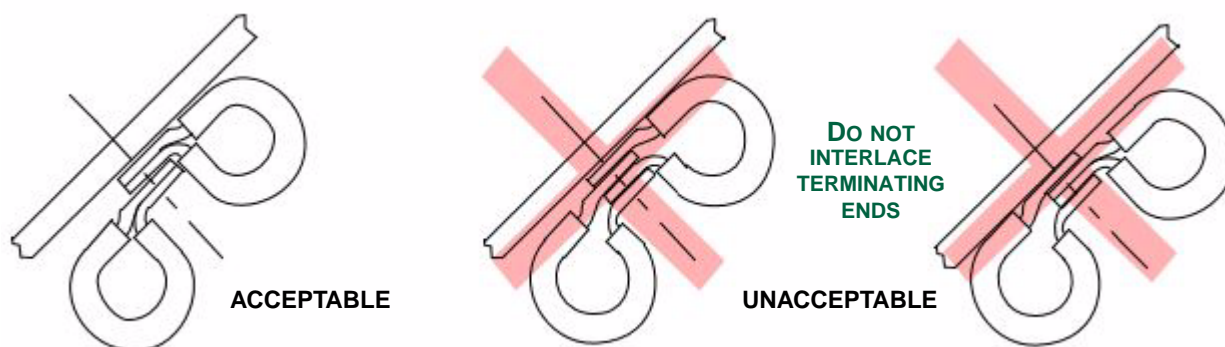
TWO CLAMPS ON ONE MOUNTING SCREW
